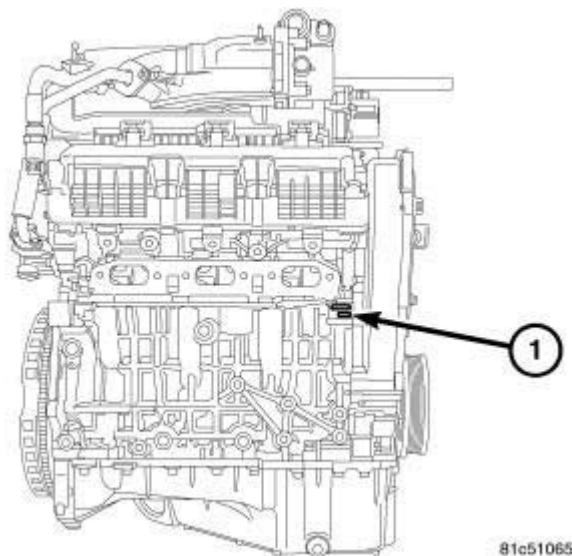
Cylinder Block Main Bearing Bore Grade Codes
